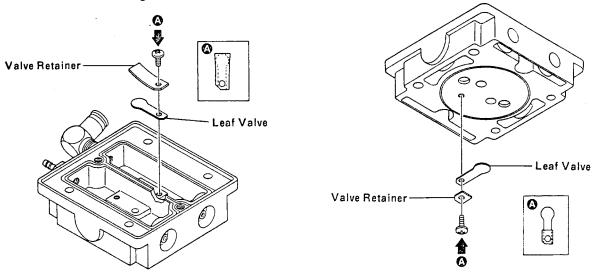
Upper Leaf Valve and Retainer
